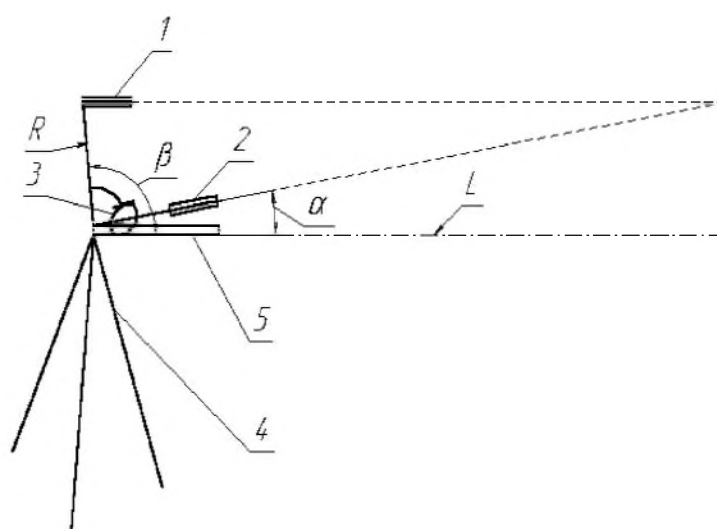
Cam device for controlling the shape and location of flat surfaces
